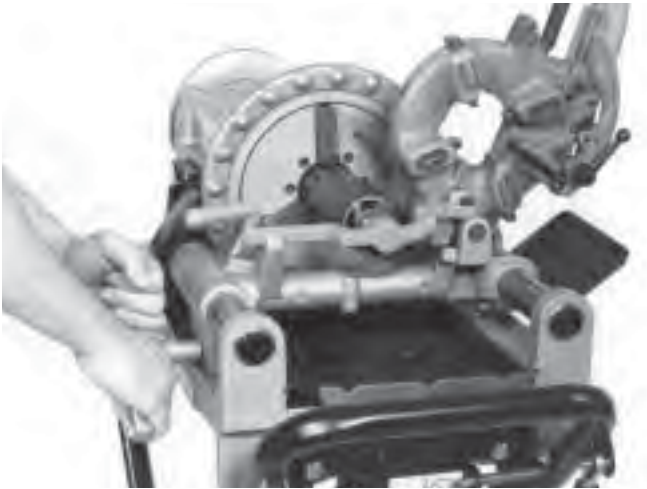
Cutting Pipe With 300 Compact Threading Machine
